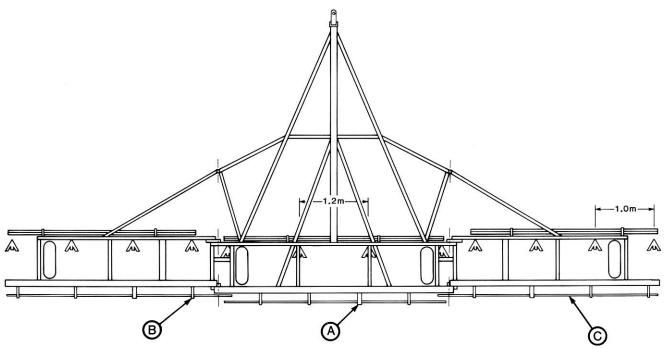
Shank Pattern (A) Rod Drives, (B) Rod Support Shanks, (C) Rod.
